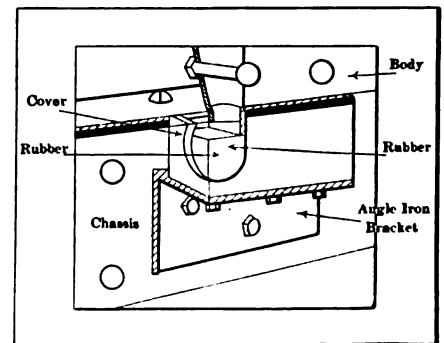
How rubber insert is used between body and chassis to secure easy riding qualities
